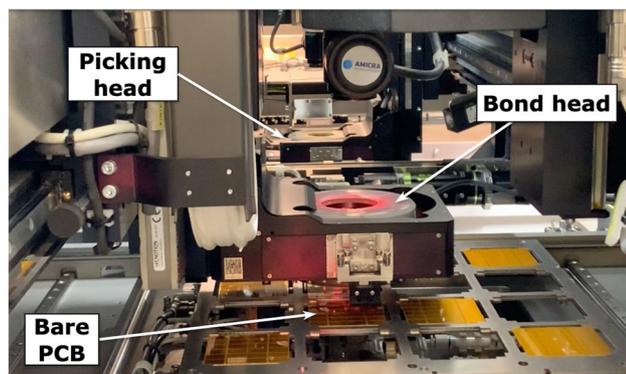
SiPM assembly on the PCBs performed using an AMICRA NOVA PLUS die attacher. The custom PCB frame holder, developed to accommodate up to 16 PCBs simultaneously, is visible at the bottom
